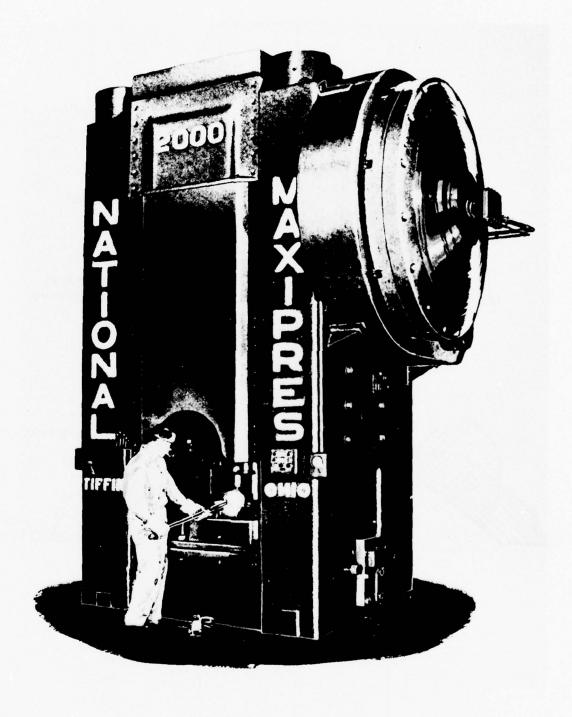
Rigid-Frame Single-Crank-Type Mechanical Press Used for Close-Tolerance Forging of Spiral Bevel Gears.
